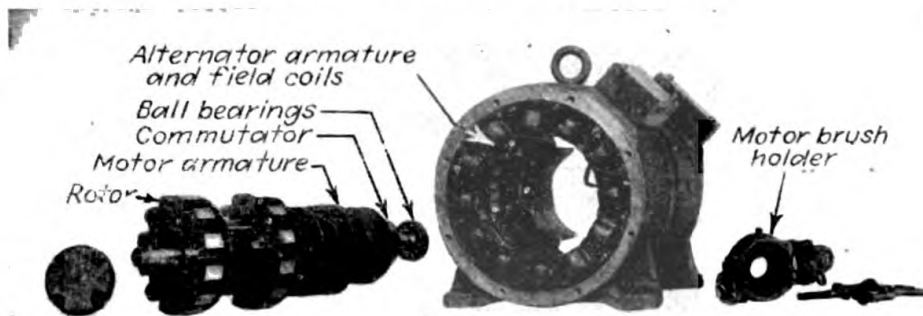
Parts of inductor-type alternator and motor-generator assembly.
